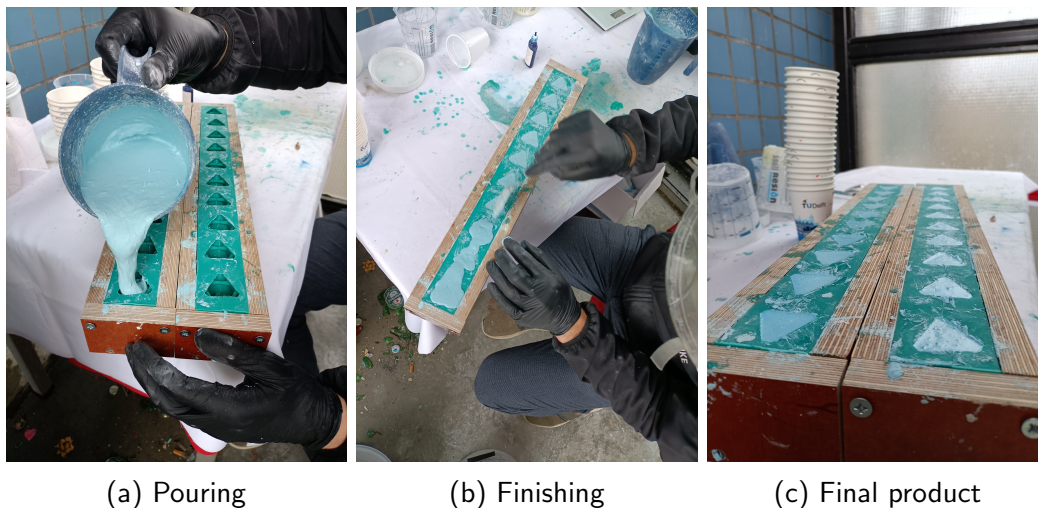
Three steps out of the casting process of the CoastaLock scale model units.
